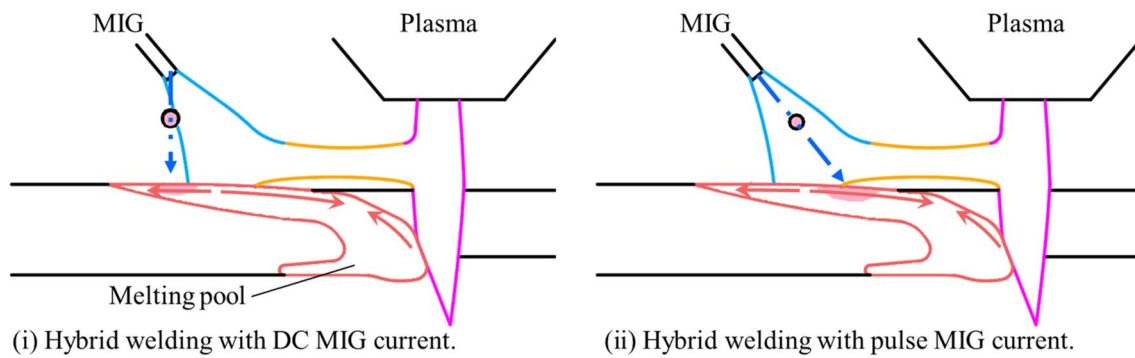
Schematic of metal transfer position onto the weld pool surface for DC-MIG current and pulse-MIG current during plasma-MIG hybrid welding
